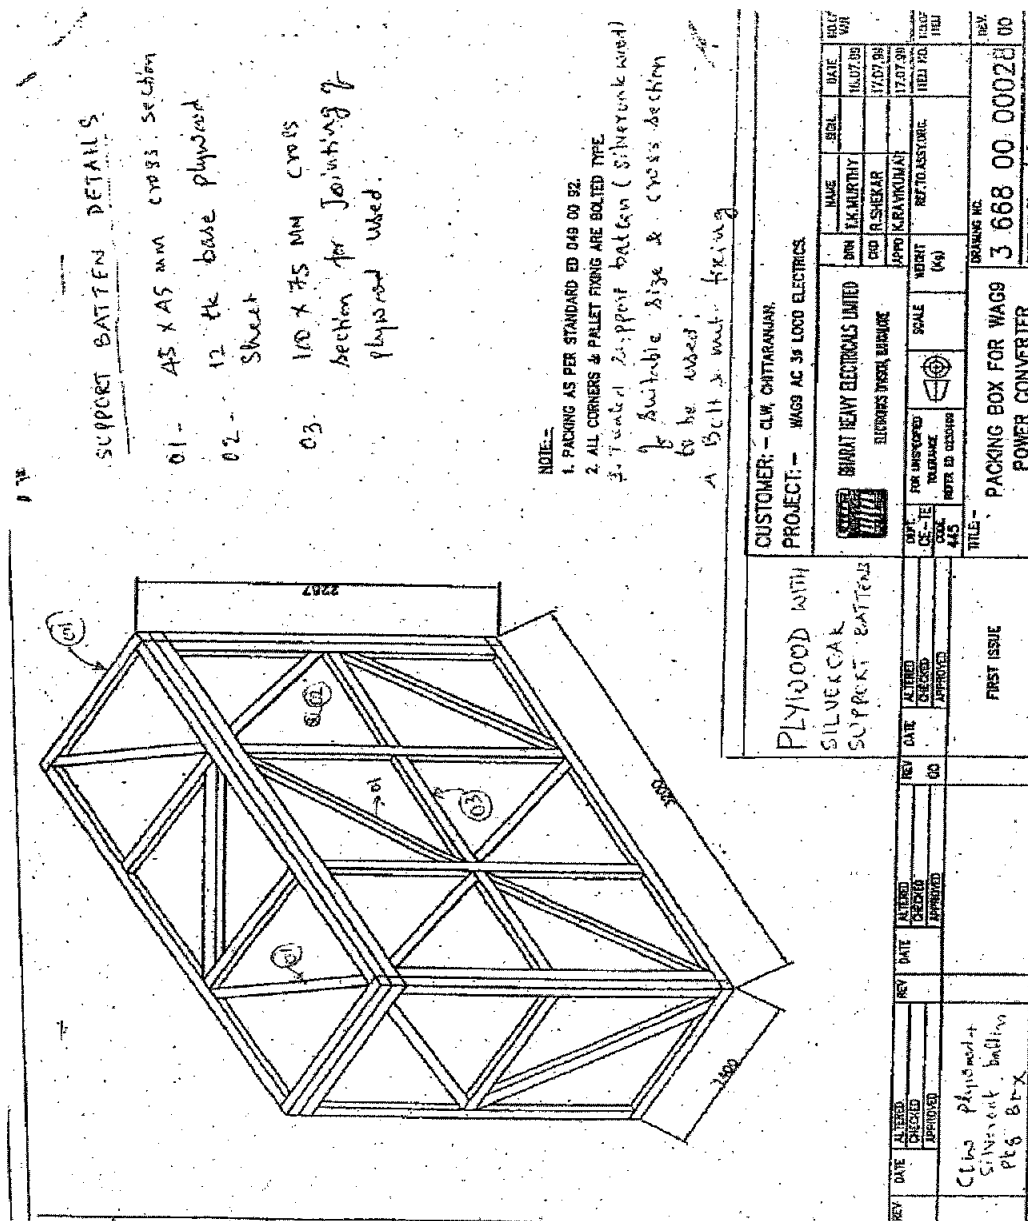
CLW Railways Panel Packing with Plywood & Silver Oak Battens
